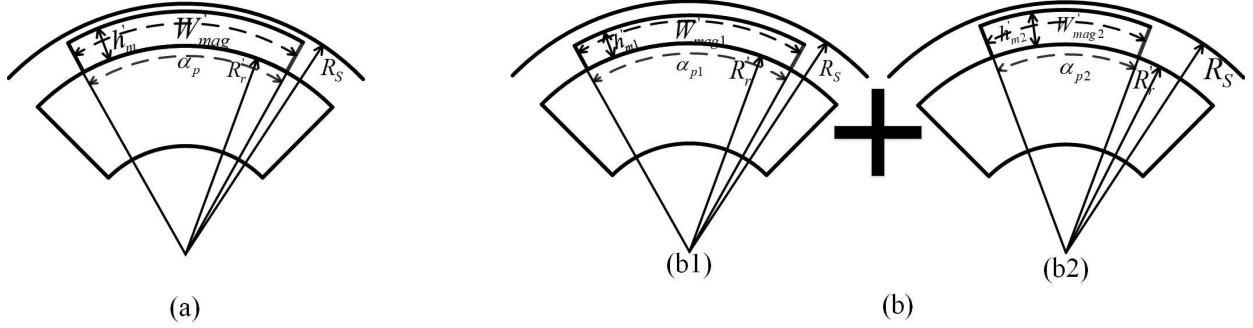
Equivalent rotor of IPM machines. (a) Single-layer. (b1) and (b2) Double-layer.
